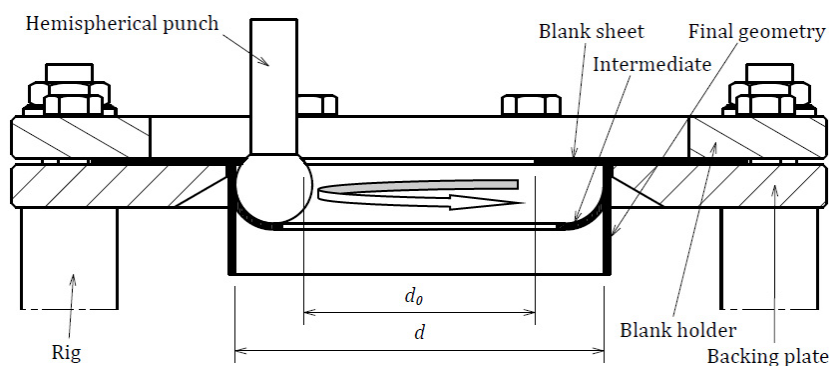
Schema of the single-stage hole flanging process by SPIF.
